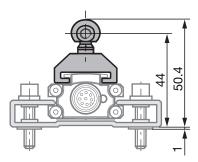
Dimensions and distances with BTL5-F-2814-1S magnet
